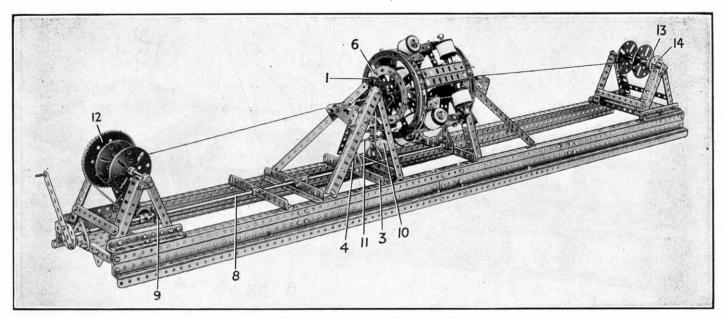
A fine model of a wire covering machine of the type used for armouring cables.
